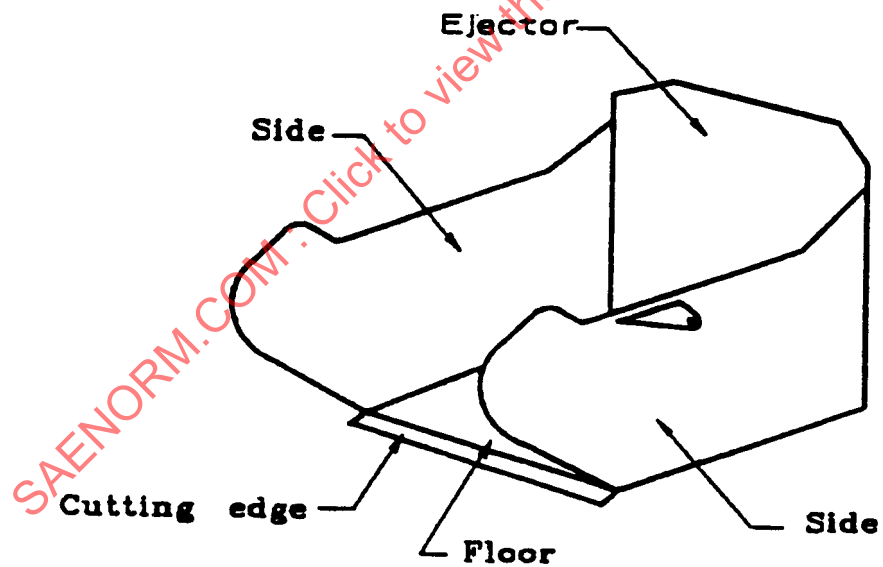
COMPONENTS OF A SCRAPER BOWL
